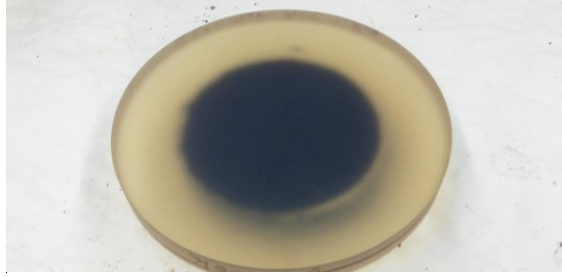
10 inch diameter Zerodur workpiece during rough grinding phase (Note: The black area in the middle shows the pitch bonding layer to the aluminum puck to mount the workpiece on the polishing machine).
